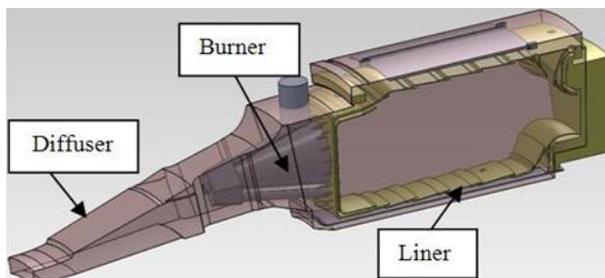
The model of single burner gas turbine combustion chamber with diffuser
